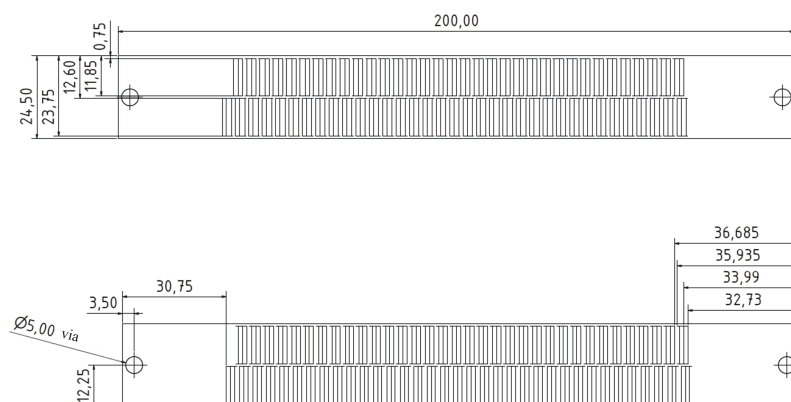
Dimensions of the ICs with external contacts: Top and bottom view of the ICs with external contacts. All dimensions are in mm. Modified from (Todt 2011).
